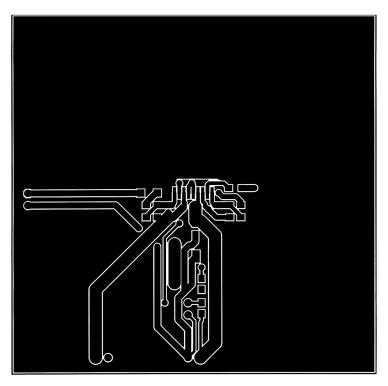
Recommended KTW BTL PCB Layout: Top Layer
